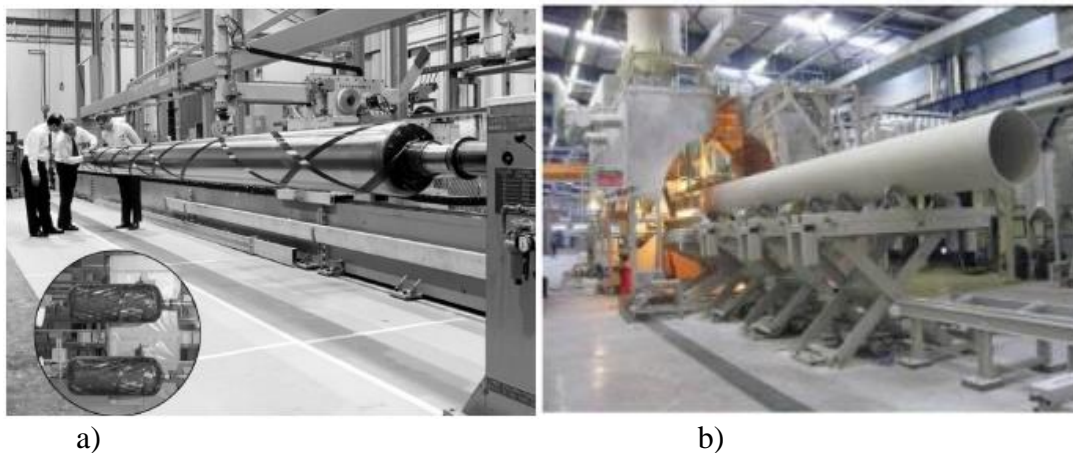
a) Angled fiber winding method, b) Continuous fiber winding machine [11].
